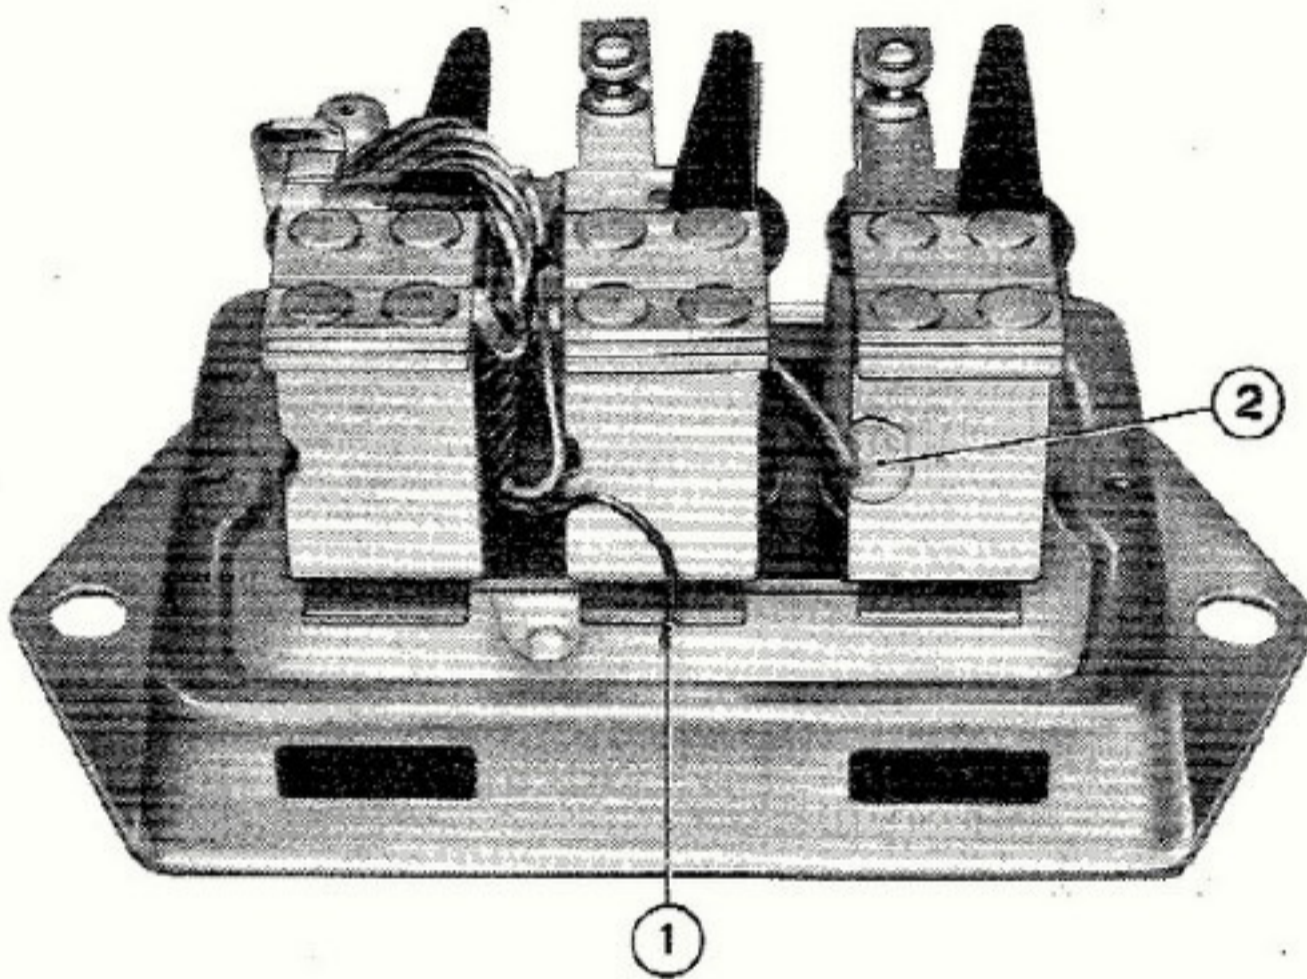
GN2/12/16 regulator assembly. Rear end view.
